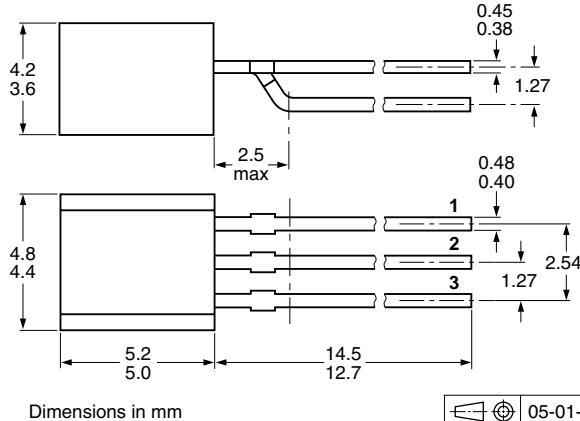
Package outline SOT54 (SC-43A/TO-92)
